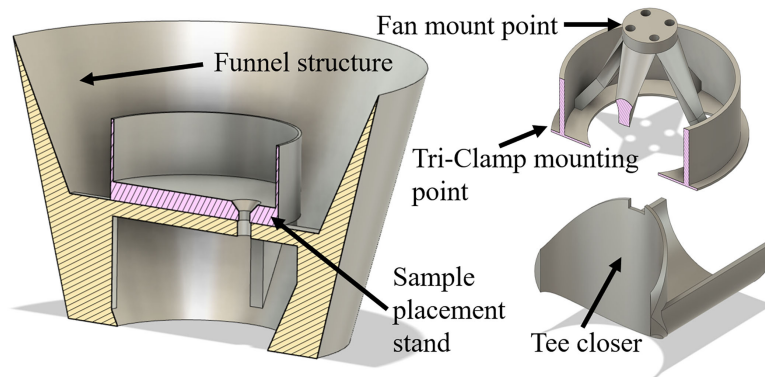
Key 3D-printed components used in the experimental flow setup, including the sample placement funnel (left), fan holder (top right), and the tee closer (bottom right)
